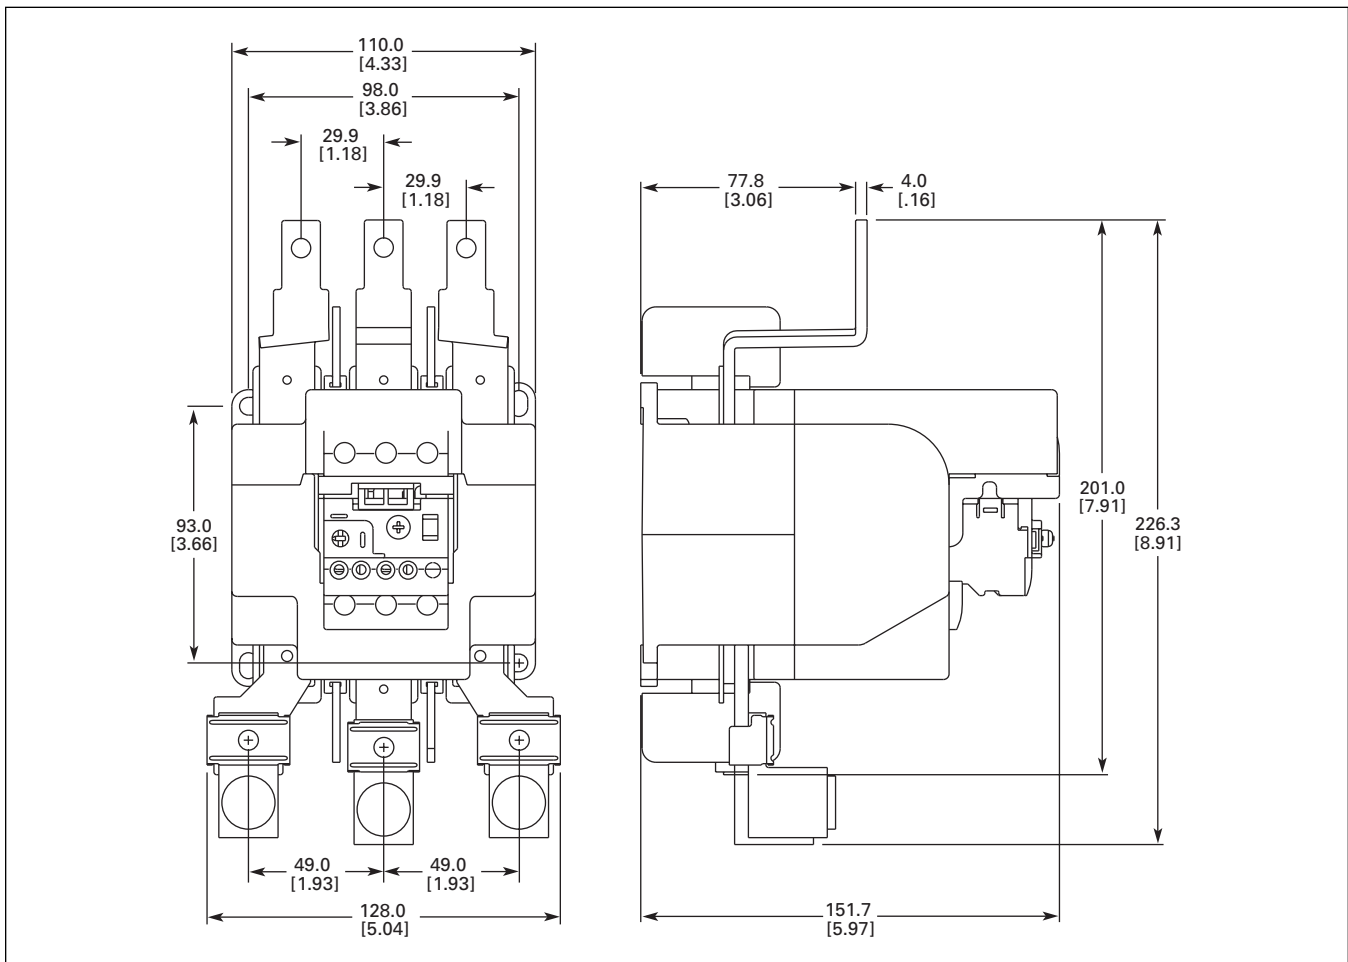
110 mm C396 (30 – 150A) + C396CBARXT Direct Connect to XT Frame G Contactor — Approximate Dimensions in mm [in]
